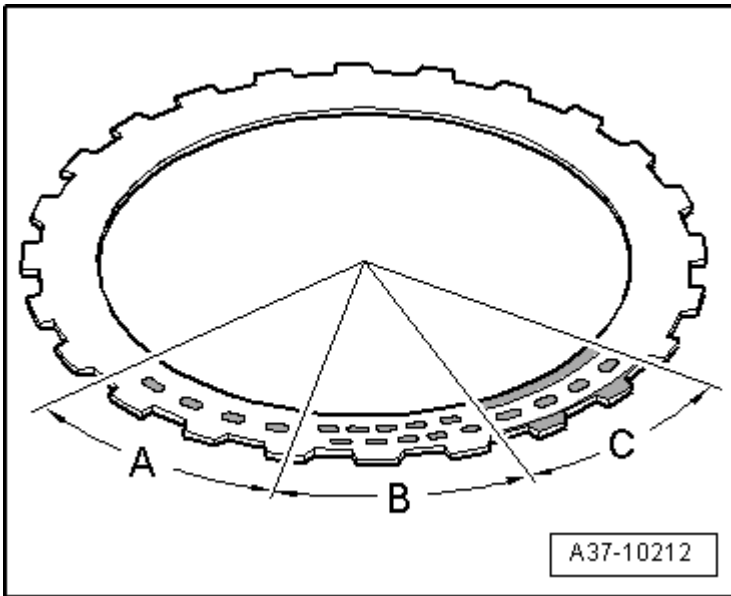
Checking Coated And Outer Plate For Wear And Overheating
